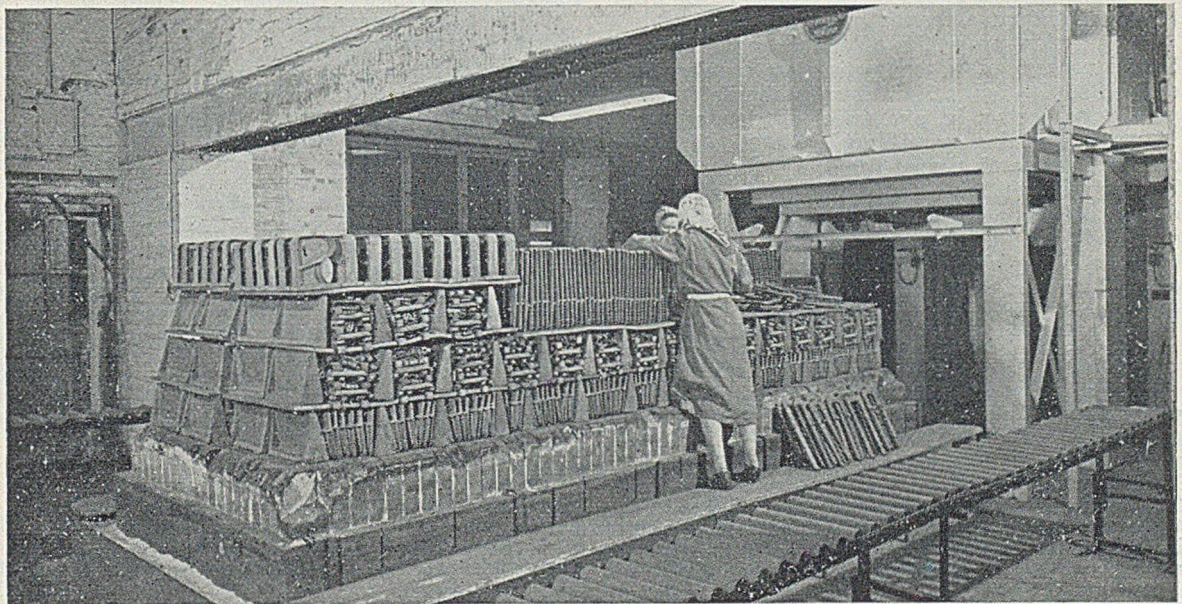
Electric Elevator-type Annealing Furnace newly installed by H. & J. Hill (Willenhall), Limited. Girl Operators are shown loading a Furnace Bogie with Castings brought to them on Roller Conveyors.
